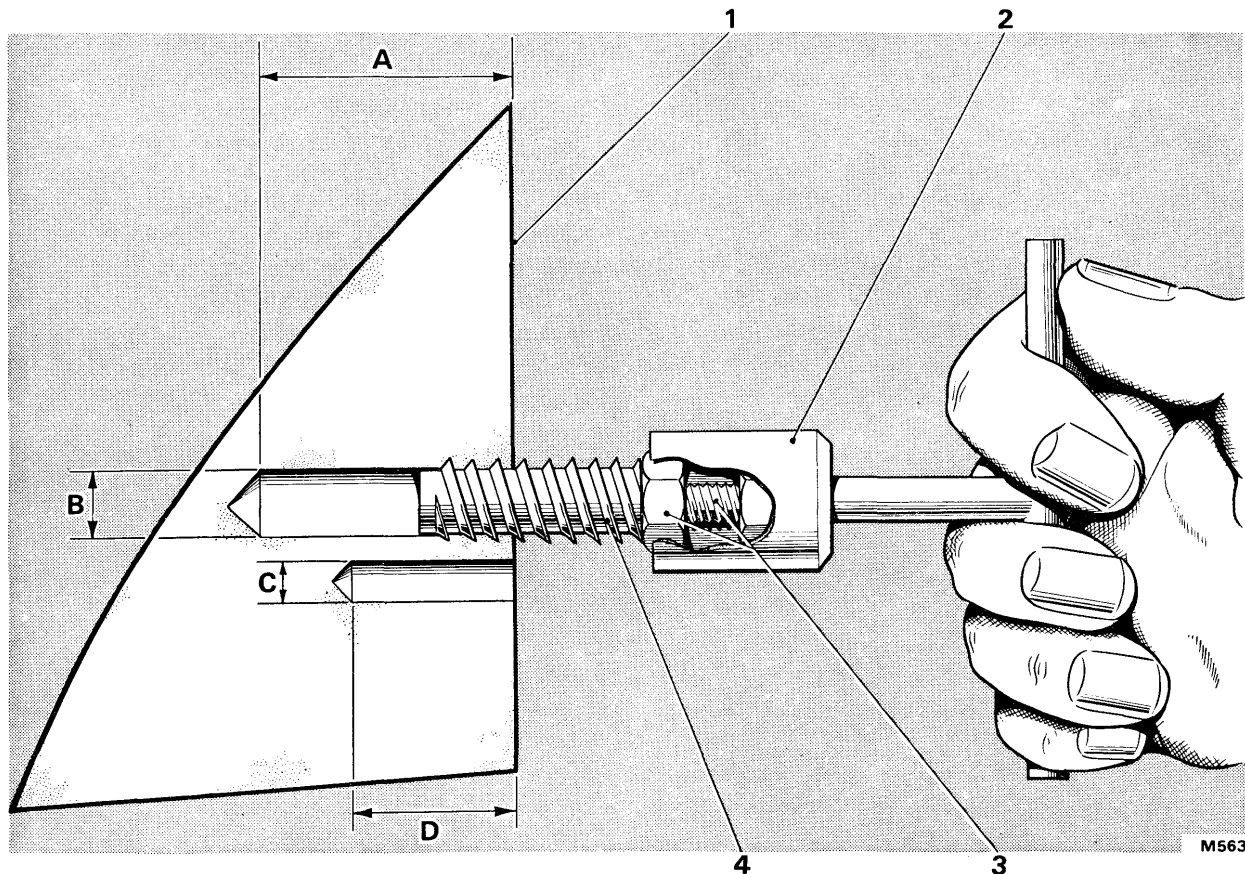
HOOD CATCH MODIFICATION—DRILLING DIMENSIONS AND METHOD OF FITTING THE BRASS INSERT
